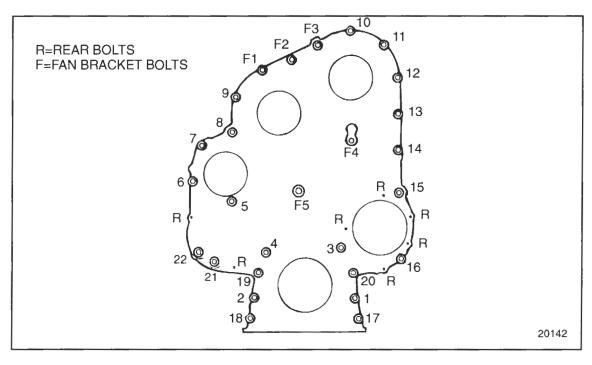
Gear Case Cover Bolt Torque Sequence (Front)
